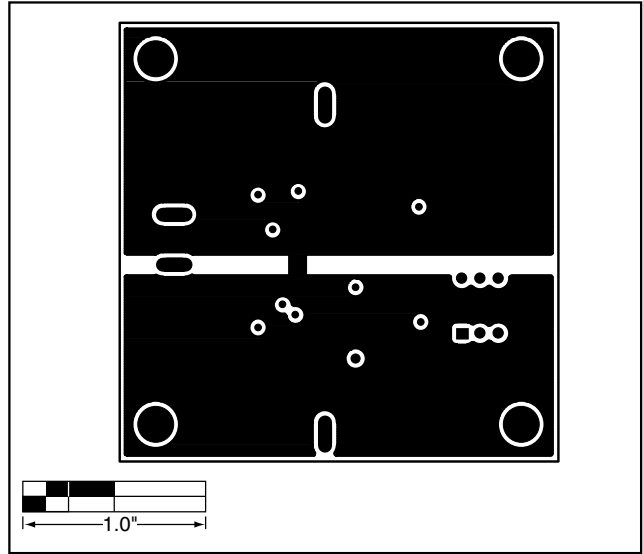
MAX1761 EV Kit PC Board Layout—Ground Plane (Layer 2)
